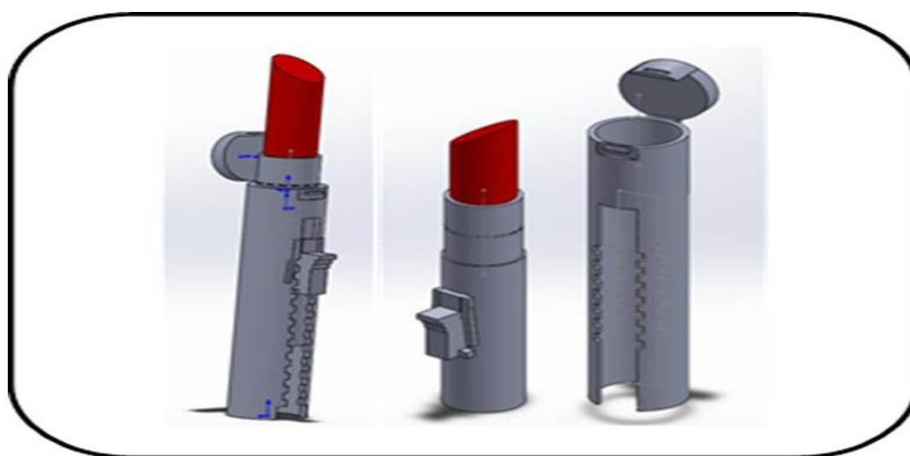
Drawing of the selected design (No.10) using Solid Work Program (Assembly: sleeve/case)
